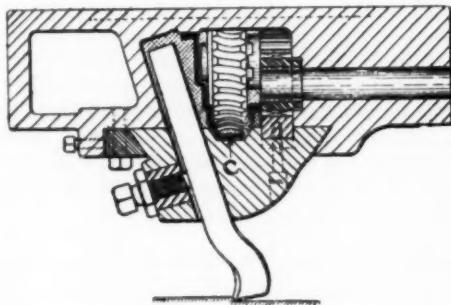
TOOL IN POSITION IN TOOL HOLDER OF MACHINE SHOWN IN FIG. 18
